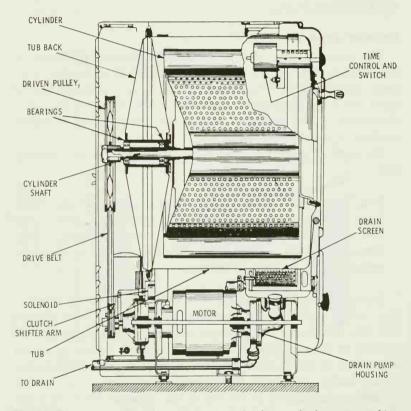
The cross-sectional view of a front-loading, cylinder-type washing machine.
